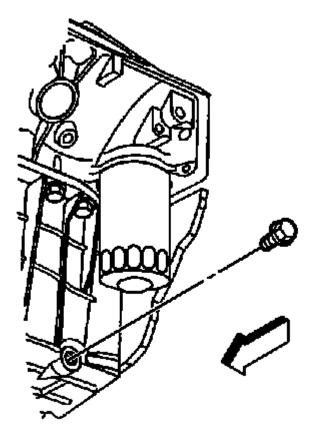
Identifying Oil Drain Plug Courtesy of GENERAL MOTORS CORP.
